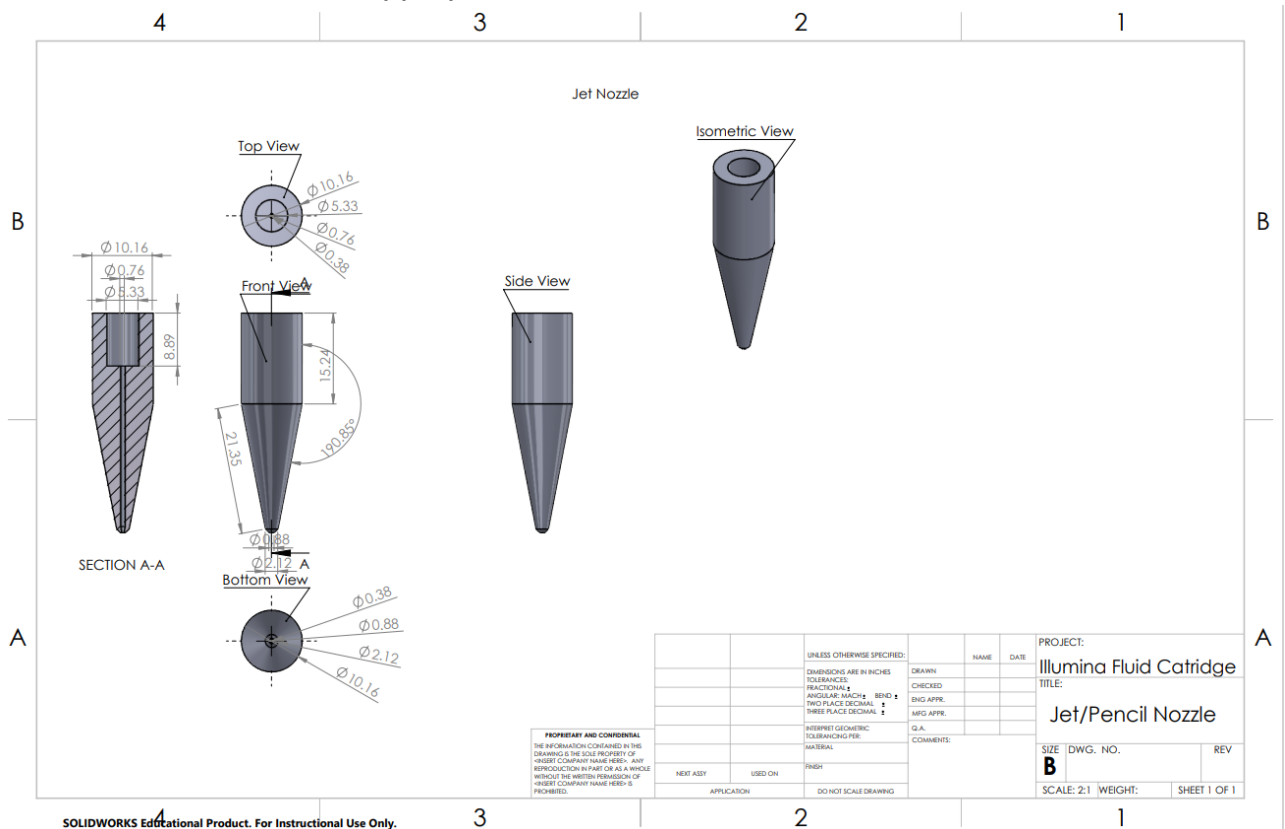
Technical Drawing of Jet Nozzle (mm). The jet nozzle has a thin (0.762 mm) and a long (25.4 mm) channel inside the ¼"-28 threaded hole. The outlet is tapered with a diameter of 0.38 mm. The tubing (OD: 1.5875 mm, ID: 0.762 mm) is connected to the jet nozzle via fittings consisting of a pair of ¼"-28 nut and ferrule.
